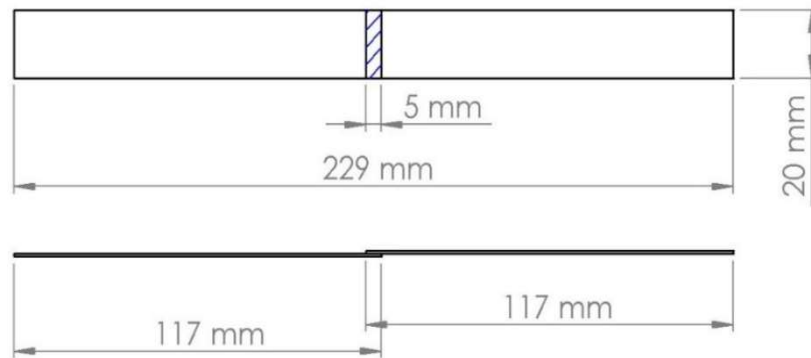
Test specimen for ABES, consisting of two veneers with bonded overlap of 5 mm × 20 mm area
